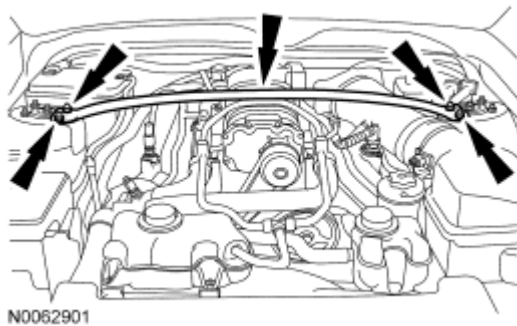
Locating Strut Tower Cross Brace & Nuts
